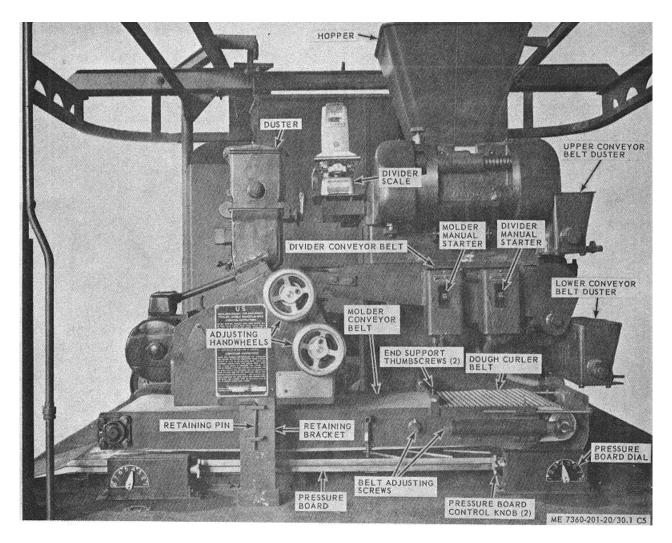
Molder and divider assemblies, Model 534-68. (ME 7360-201-20/30.1 C3)
